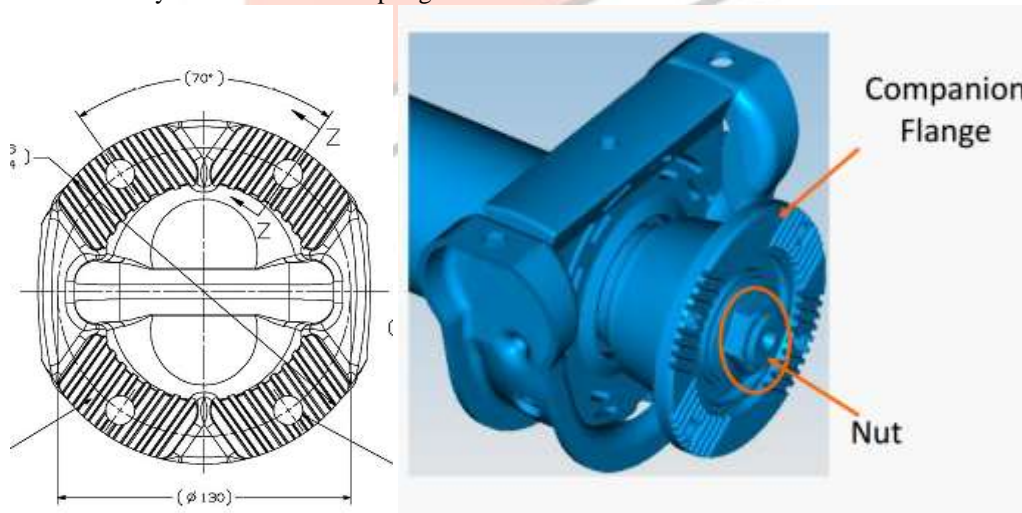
1710 Series Flange design of a companion Flange, [6]
